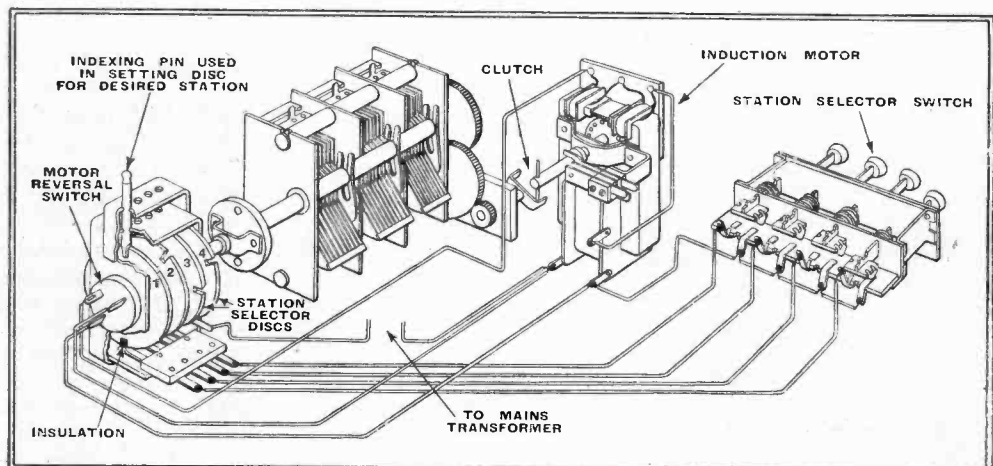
Schematic drawing of motor tuning system as represented in Fig. 1, showing push-buttons, motor with clutch and contact-springs and the group of contact-discs with the motor-reversing switch. These contact-discs are held on their shaft by friction and are easily adjustable by locking them with a special pin and turning the condenser by hand to the desired station.
